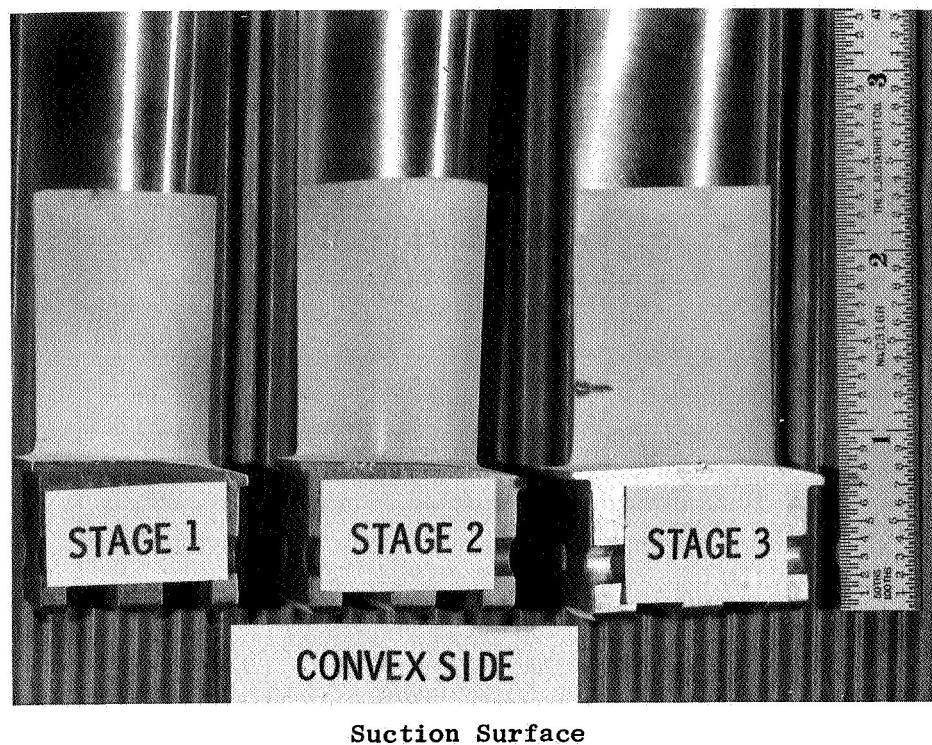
Fatigue Endurance Test Blade Failures, Plain Blade Suction Surfaces.
